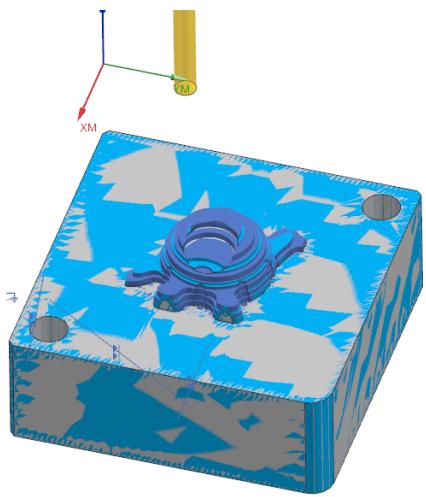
$\frac{1}{4}$ " Cavity Mill Finishing
